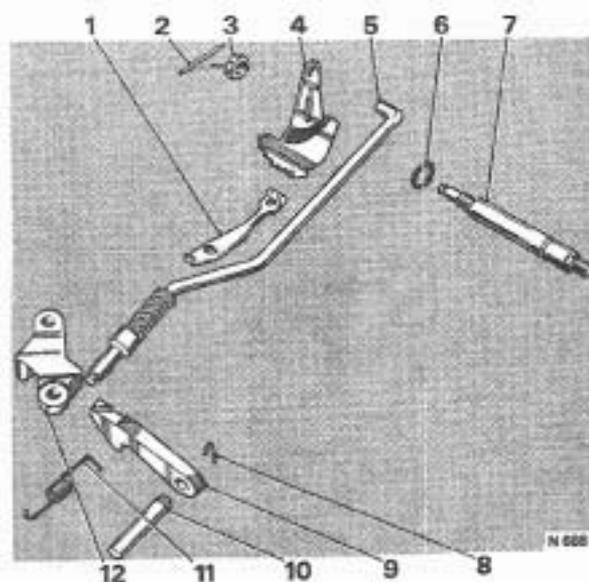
MANUAL AND PARKING LINKAGE—EXPLODED
